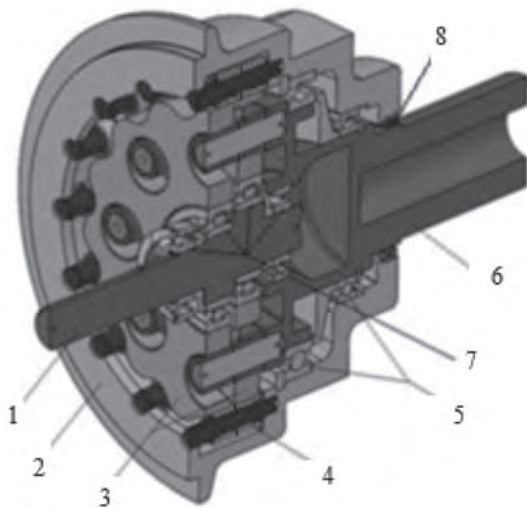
Cycloidal drive: 1 – input shaft, 2 – housing, 3 – cycloidal discs, 4 – outer pins with sliding sleeves, 5 – bearings of the output shaft, 6 – output shaft with inner pins and sliding sleeves, 7 – eccentric bearings of the input shaft, 8 – sealing of the output shaft
